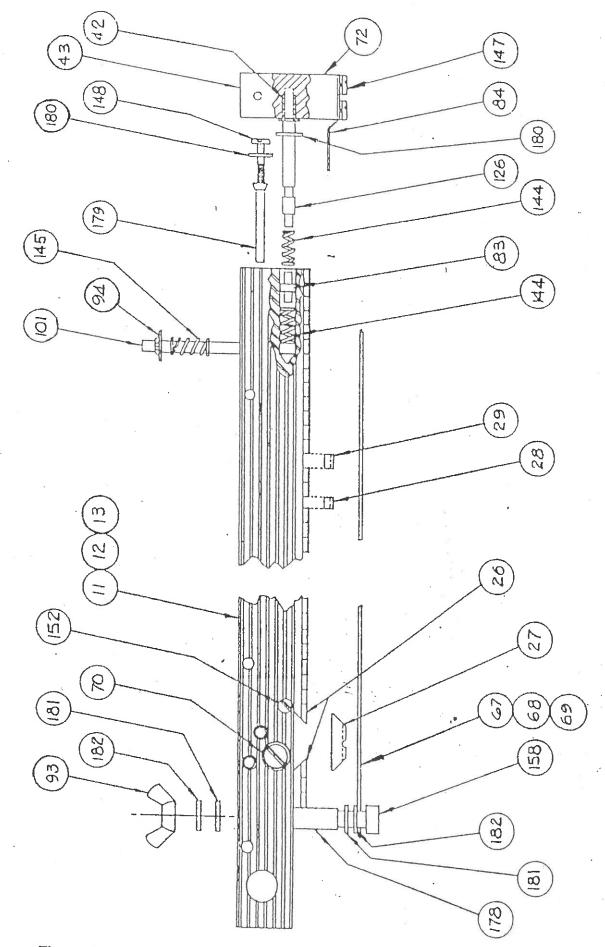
Electrode Bar Assembly, Complete, Side (Item 18, 19, 20)
